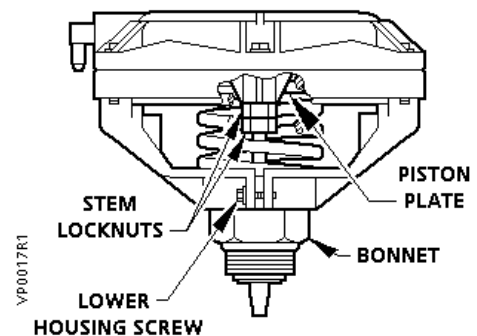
Actuator Assembly on Normally Open (N.O.) Valves.
